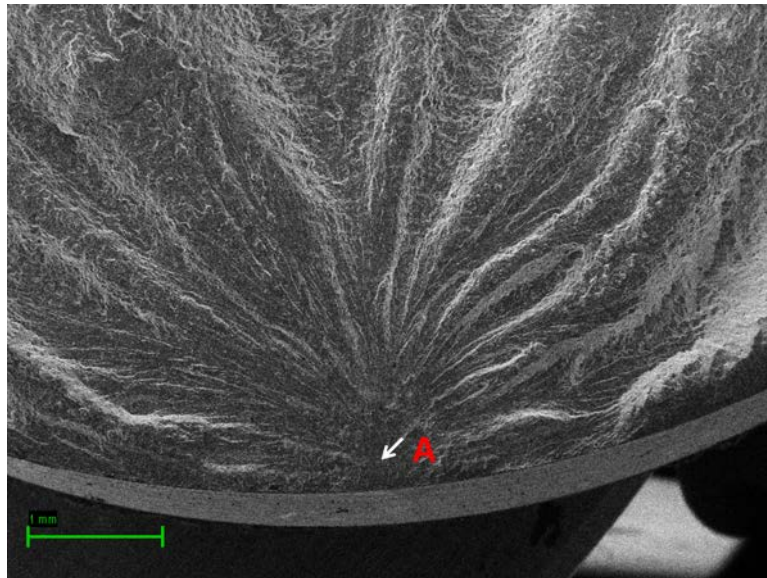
Fractograph of Fatigue Life Healed Test Specimen
